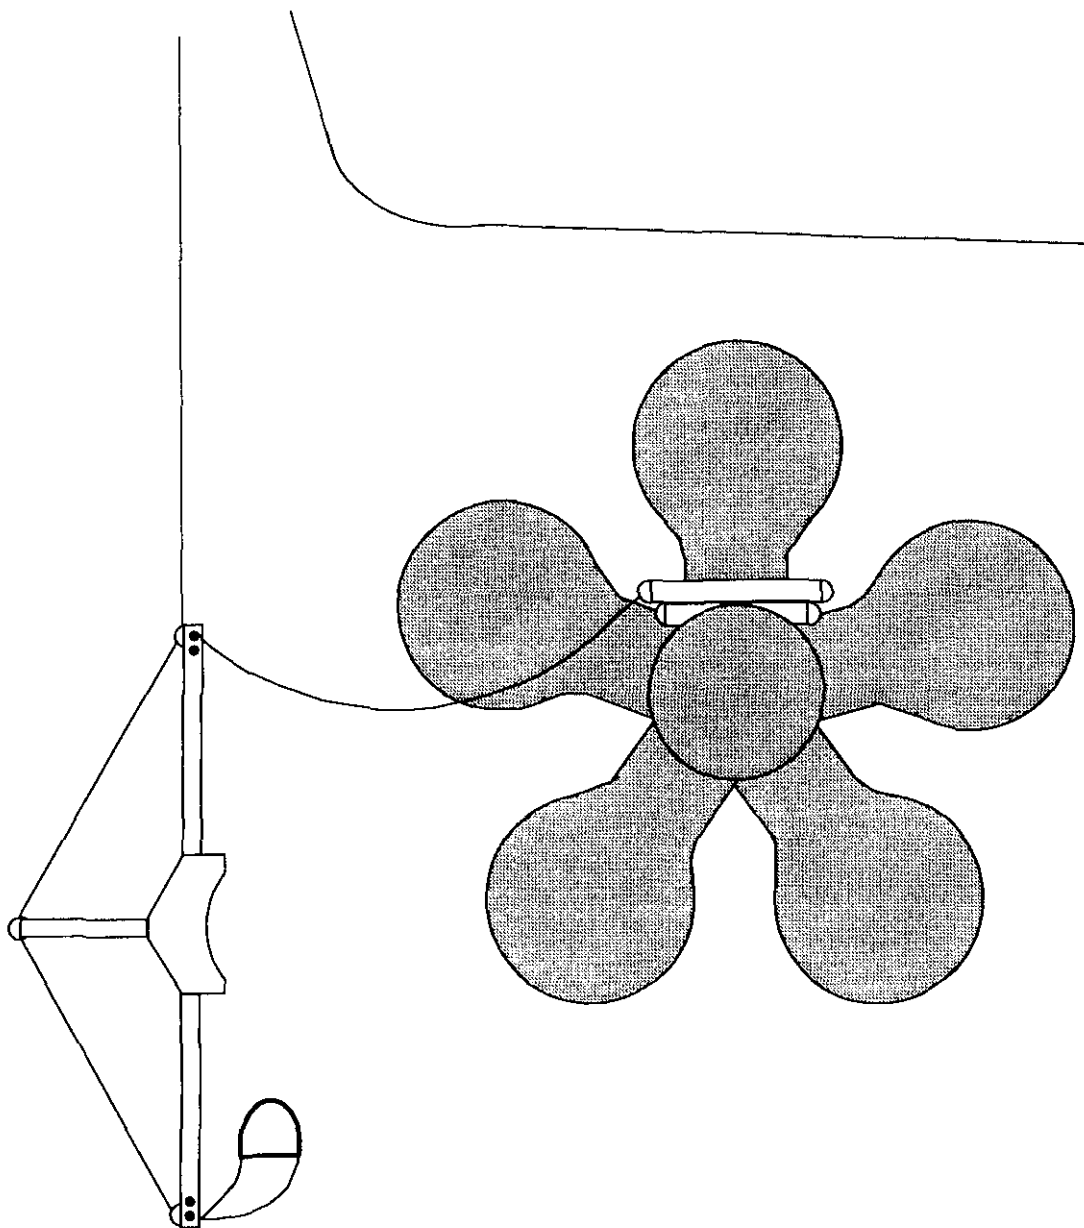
LOWER FRAME POSITIONED OUTBOARD OF PROPELLER
